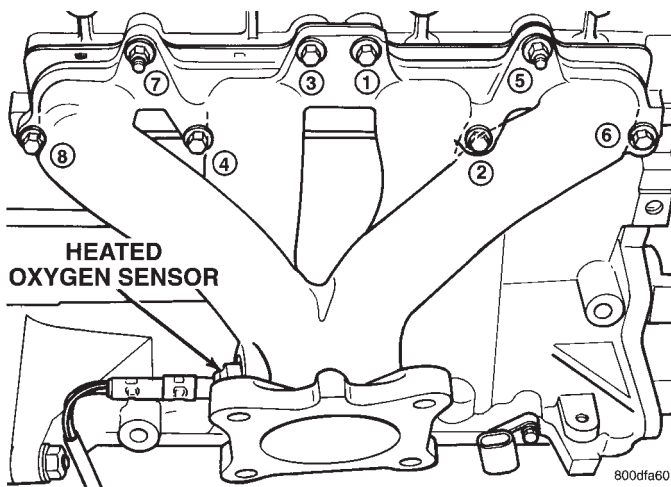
Exhaust Manifold Attaching Points—2.4L Engine
